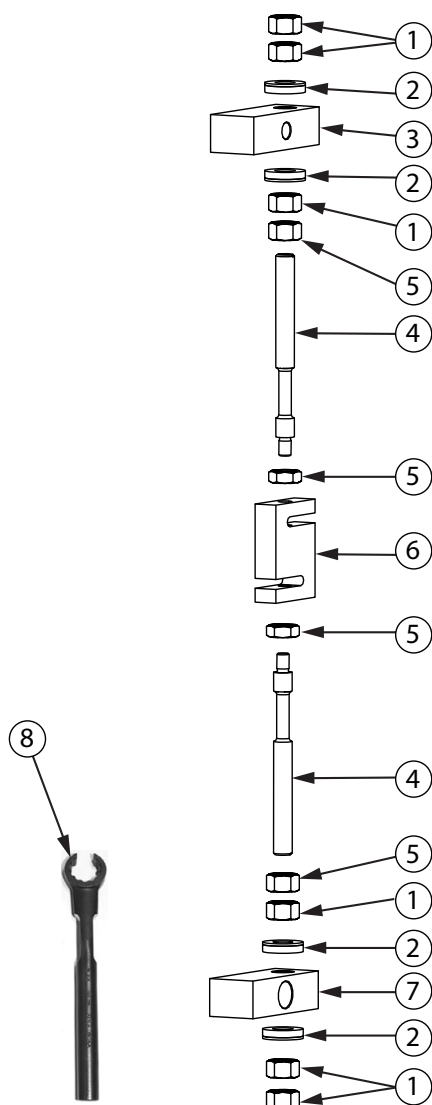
Load Cell Replacement Kit Parts Illustration
